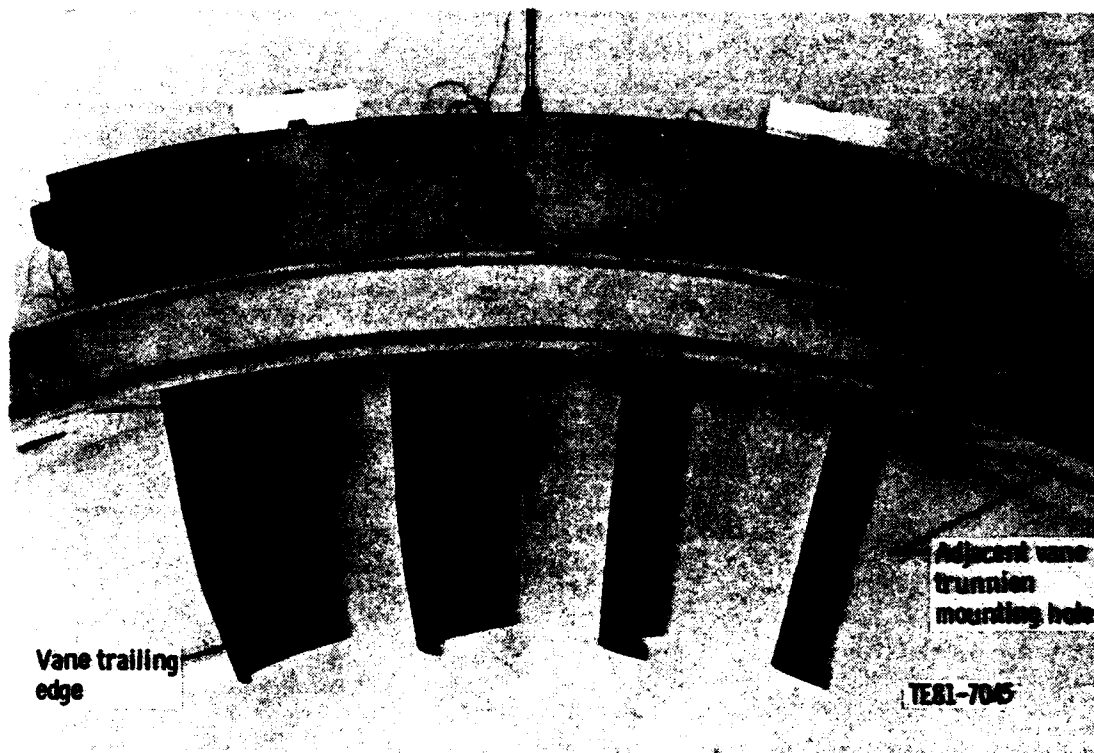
Instrumented four-vane cascade assembly installed in compressor casing.
